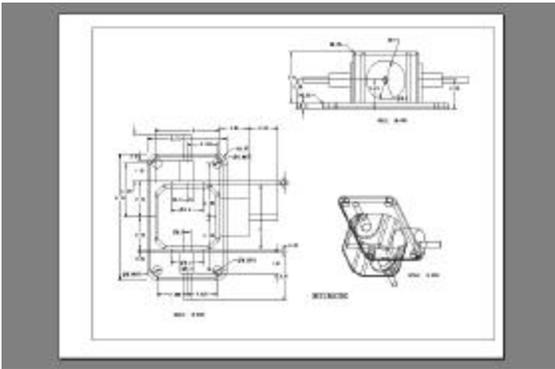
Typical CAD drawing of a mitre gear box. This component was one of four deployed for the jacking system.
